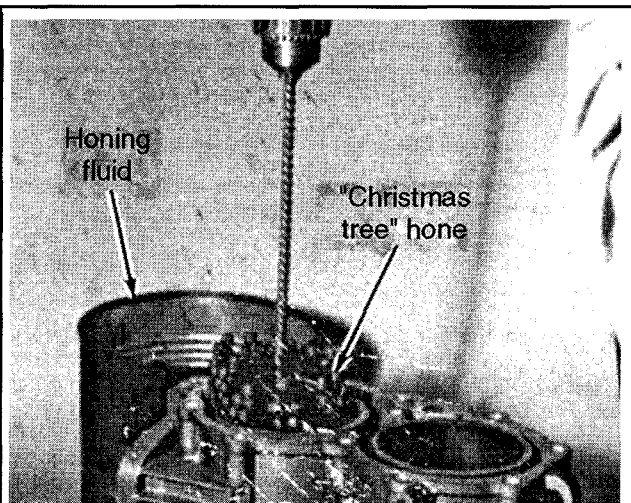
otherwise a cylinder hone must be used to break the smooth glazed surface into a cross-hatch pattern
